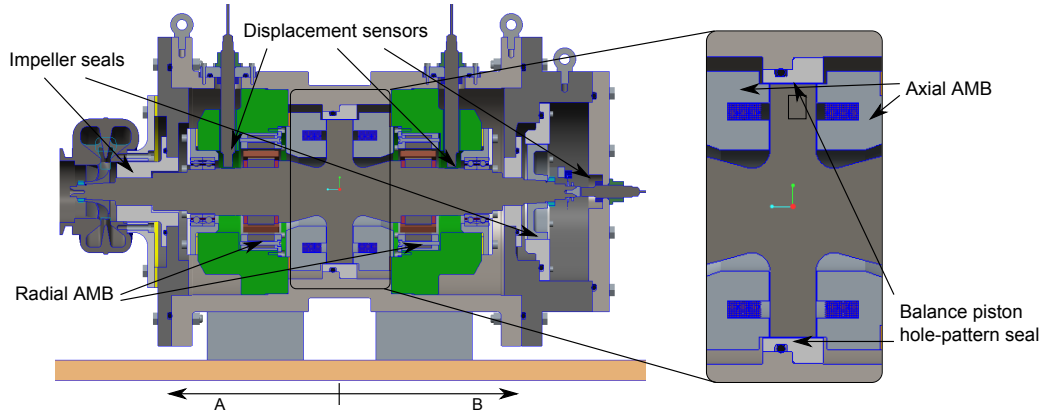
Cross section of the turboexpander testrig. An enlargement of the center section shows the balance piston on which the axial bearings acts and where the hole-pattern seal are placed
